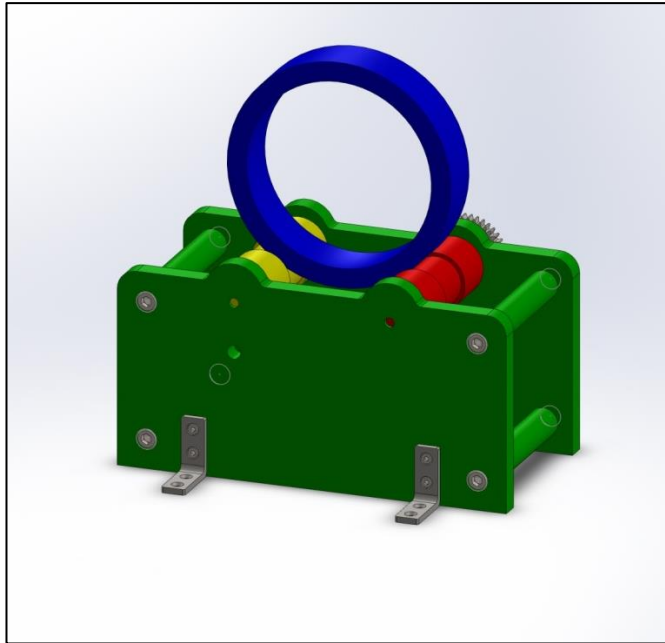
A rolling ring to investigate droplet behaviour. A microprocessor-controlled motor would have driven the red drive roller, which drives the replaceable ring (blue). The ring would have varied diameters and surface treatments, and the settling angle of droplets with different sizes and droplet properties would have been investigated at varied tangential velocities.
